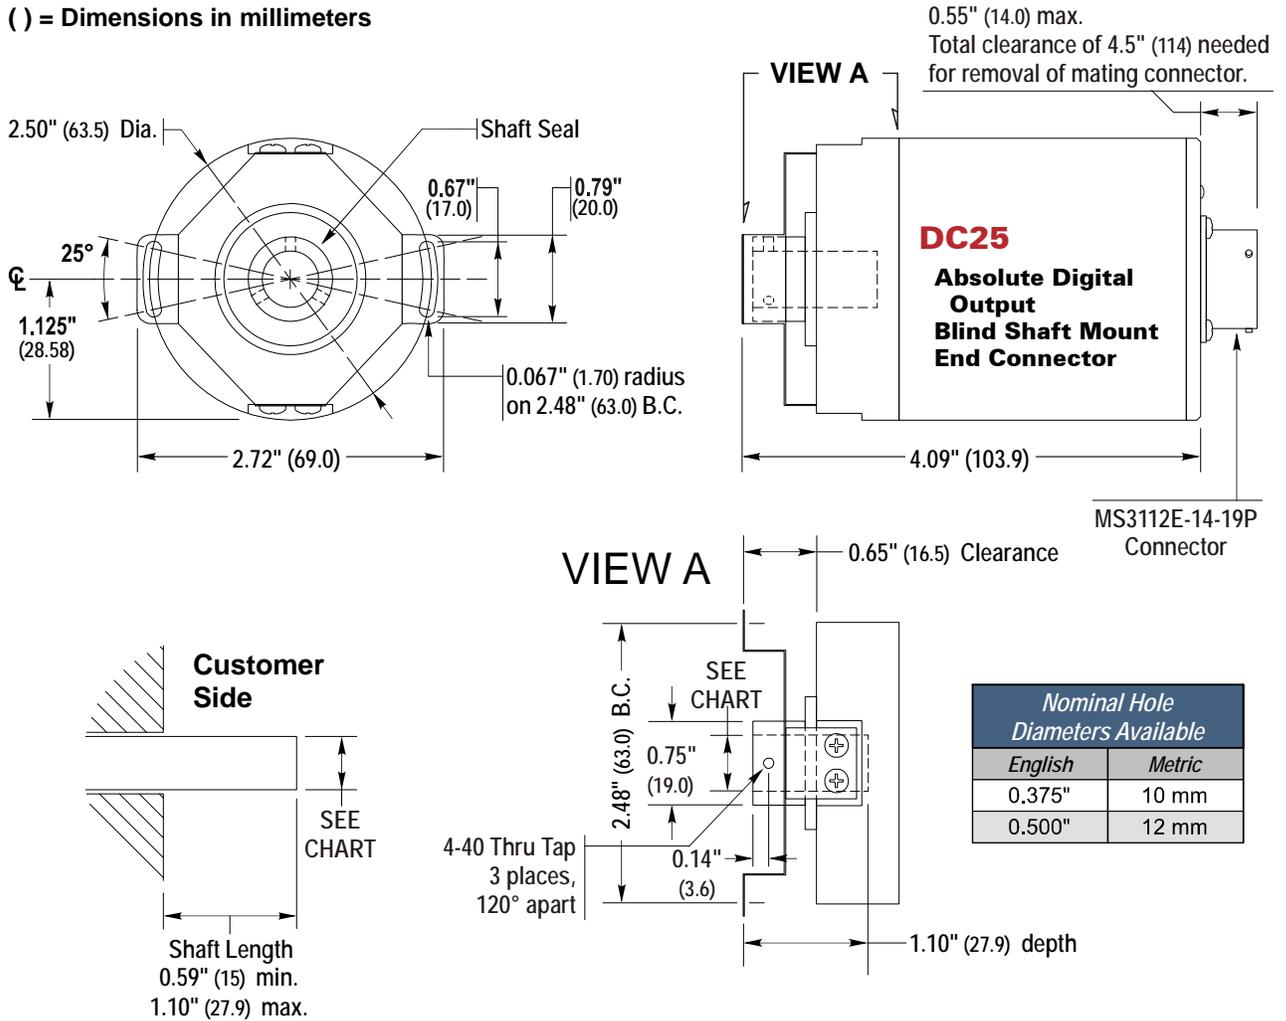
Blind Shaft Mount, End Connect Outline Drawing
